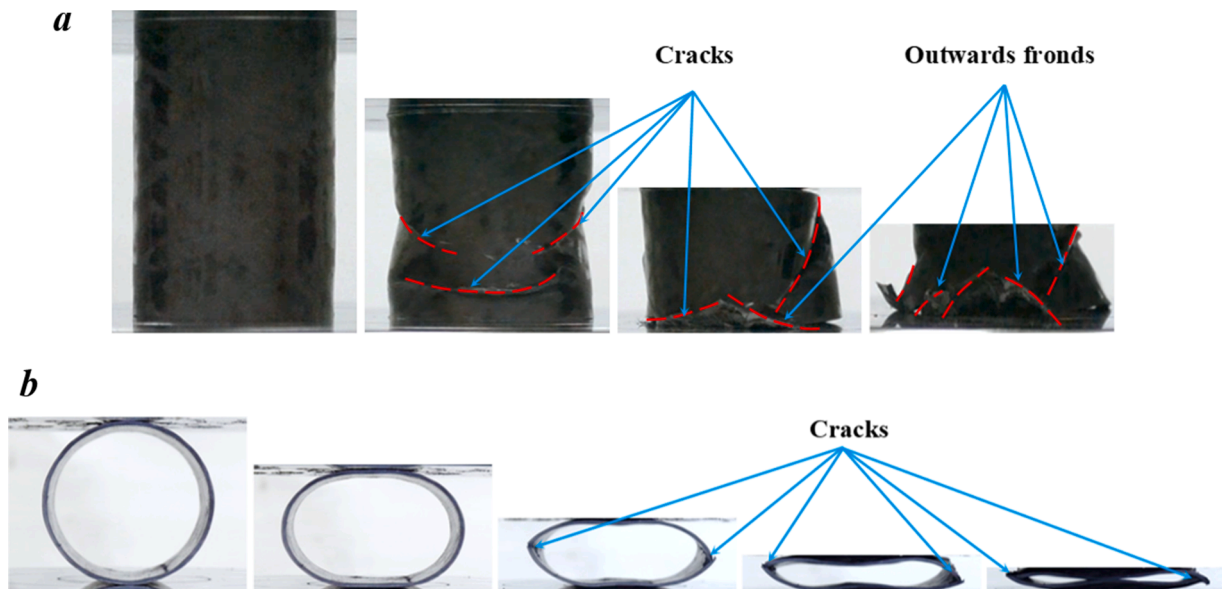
Crushing behavior of CFRP tubes: (a) axial compression; (b) radial compression.
